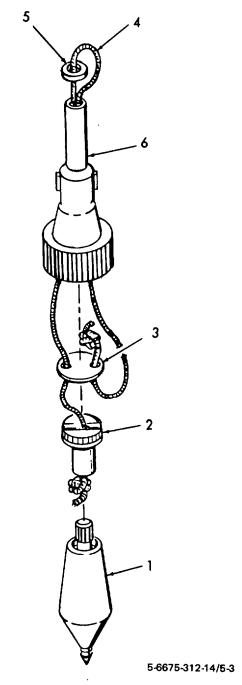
Plumbbob assembly, disassembly and reassembly
